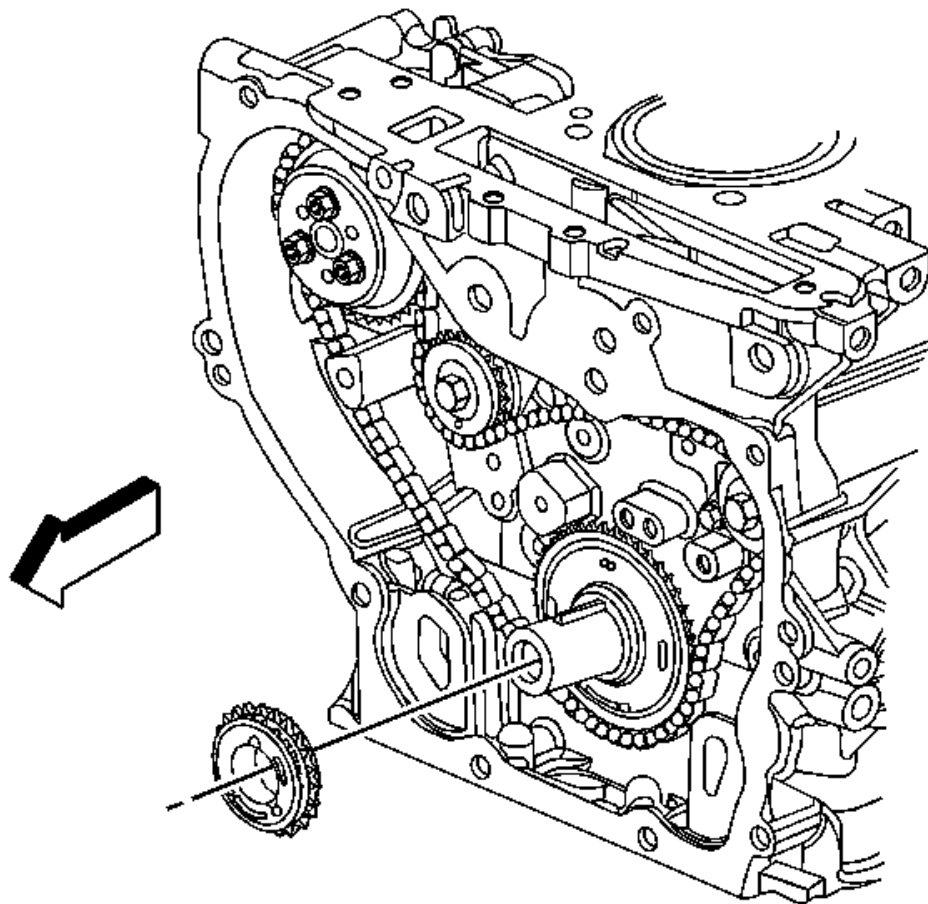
View Of Timing Chain Crankshaft Sprocket
